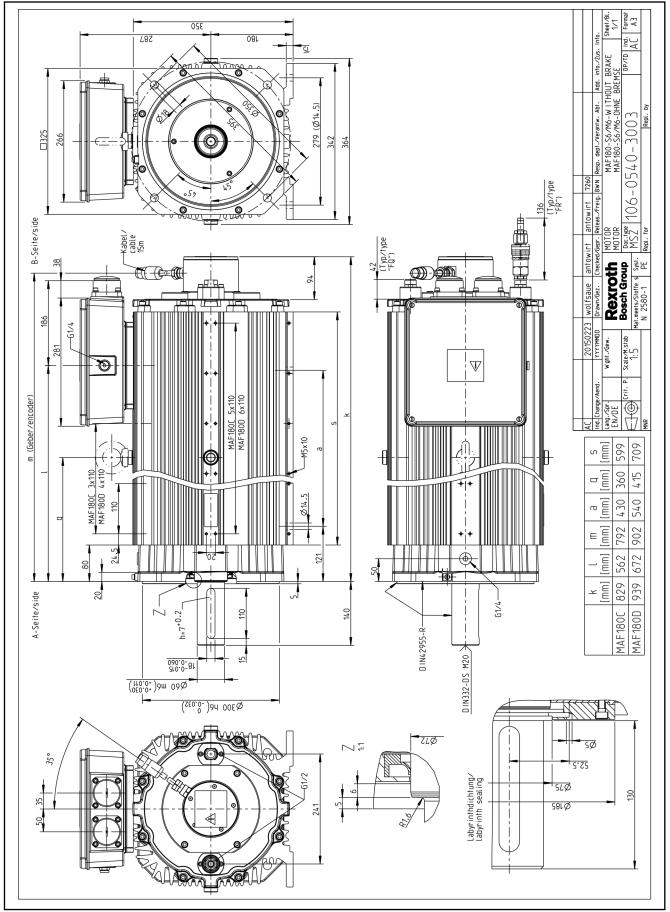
MAF180 with encoder M6/S6, without brake
